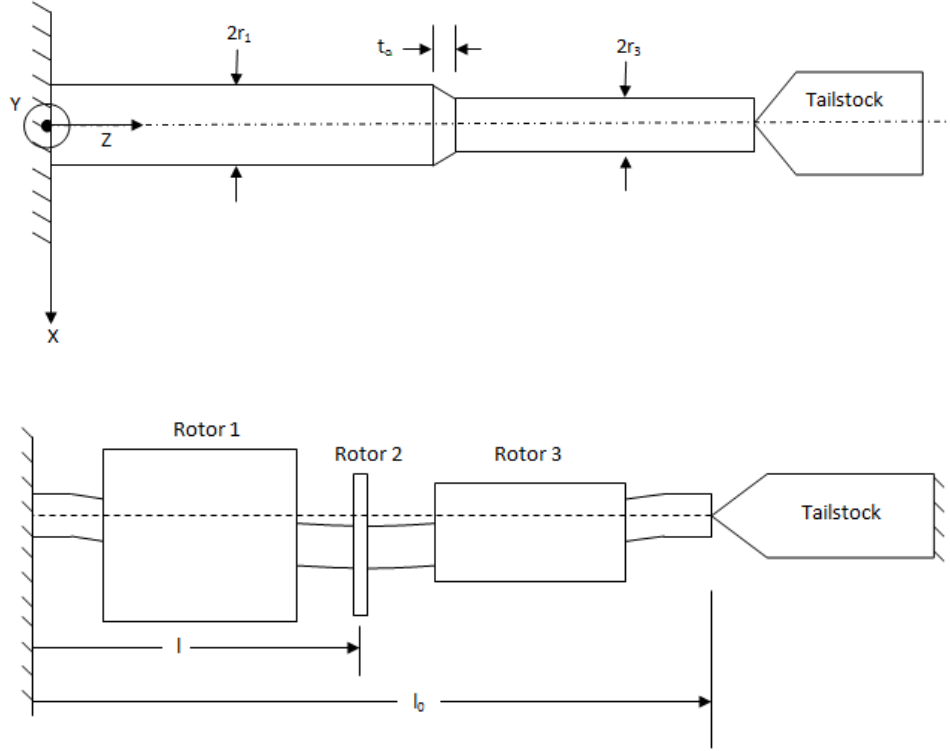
Workpiece configuration (top) and workpiece modeled as 3 rotors (bottom)
